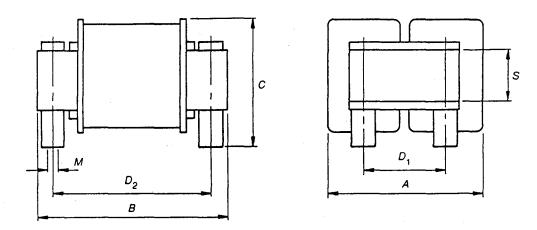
Level mounting style for transformers and inductors using laminations YUI 1-10 to YUI 1-80 – pillar mounting
